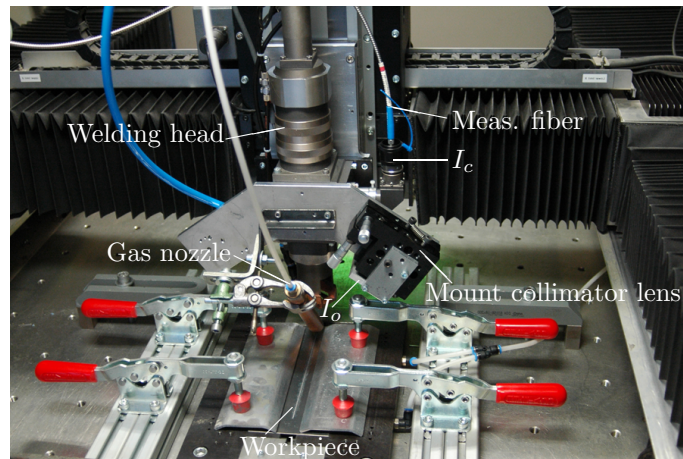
Photo of the BEO D70 Trumpf laser welding head with the coaxially mounted spectroscopy measurement fiber, on the gantry manipulator.
